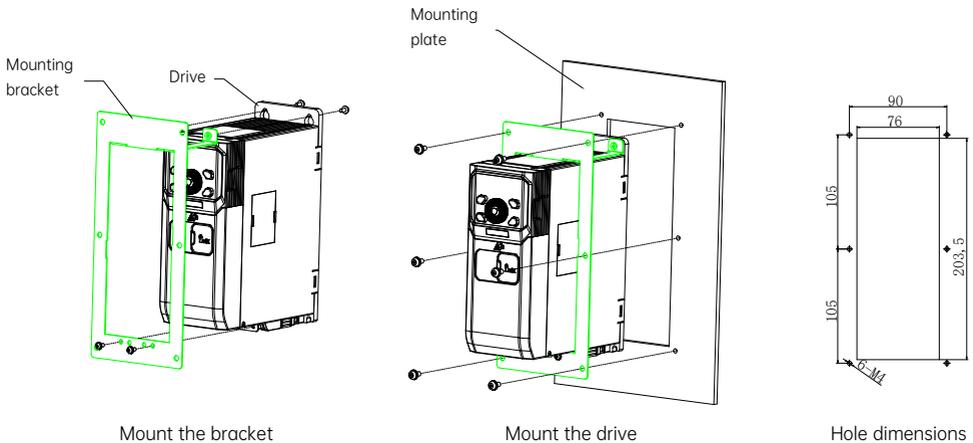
MV810-EMBB embedded mounting bracket kit
